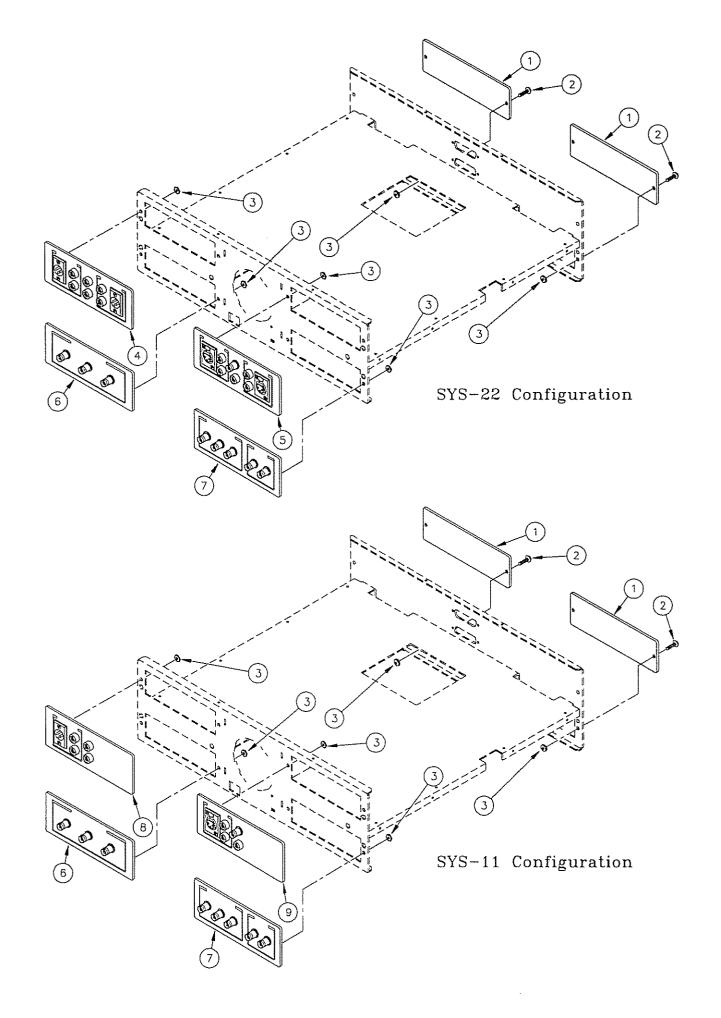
FRONT AND REAR PANEL ASSEMBLY
